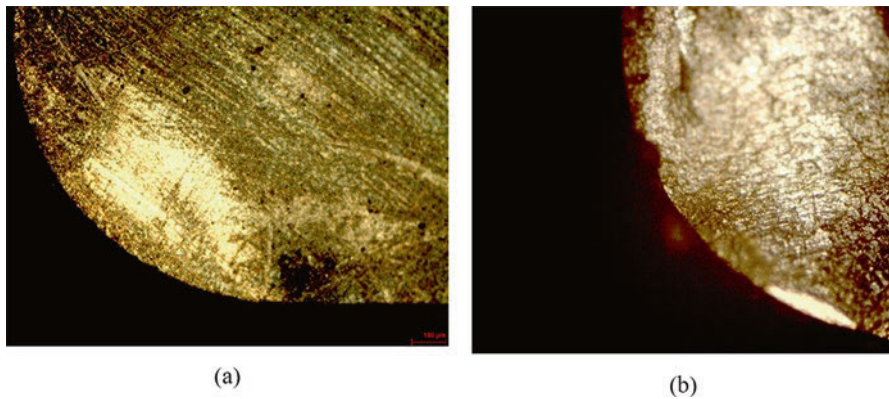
Optical images of tool insert after machining at (a) Speed = 106 mm/min, Feed = 0.16 mm/rev, Doc = 0.6 mm and (b) Speed = 138 mm/min, Feed = 0.08 mm/rev, Doc = 0.4 mm
